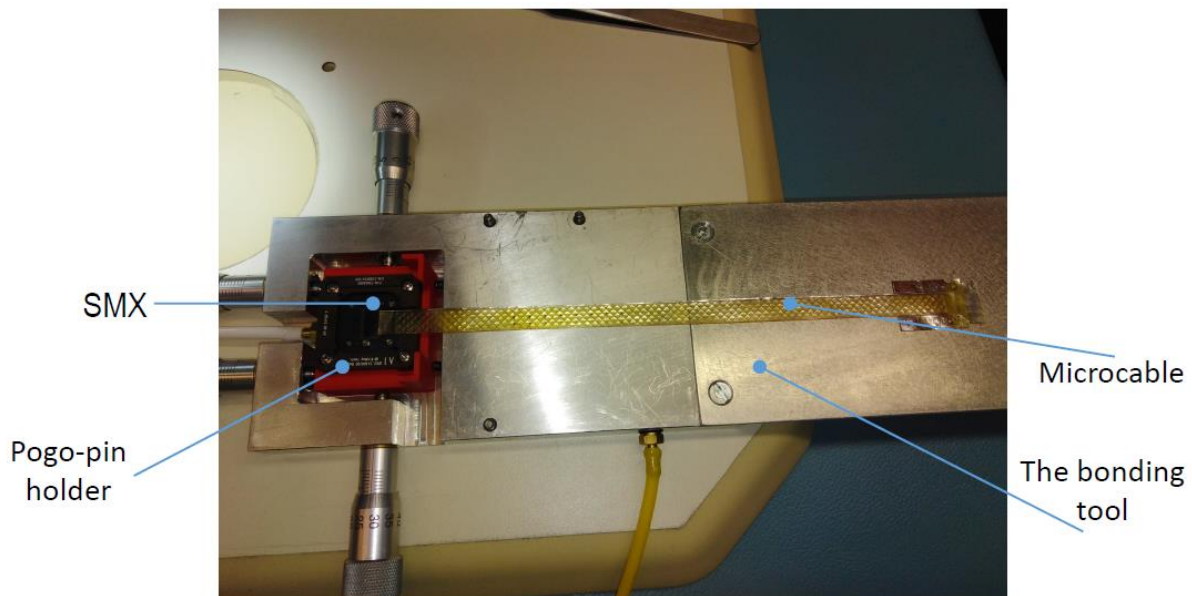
ASIC ("SMX") bonded to a micro-cable installed in pogo-pin holder on the bonding tool.
